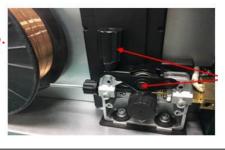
Setup and installation of MIG welding machine
